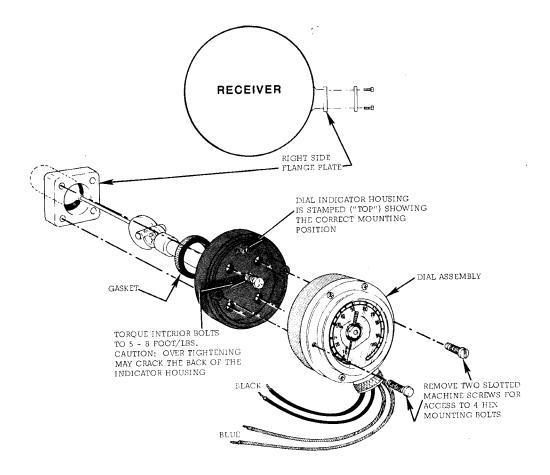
Installation of the 2-Stage Refrigerant Loss Alarm/Indicator
